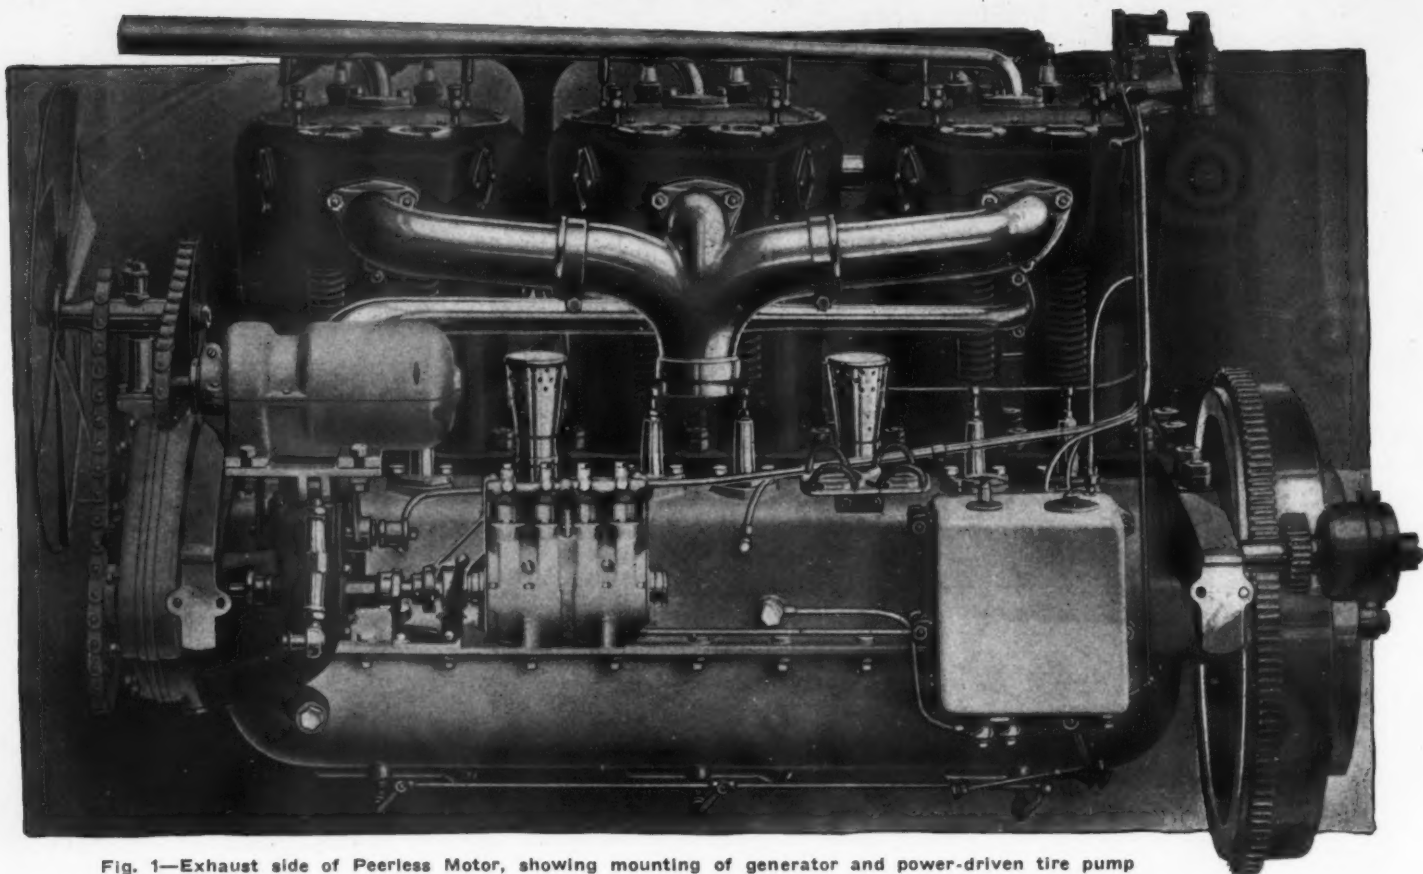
Exhaust side of Peerless Motor, showing mounting of generator and power-driven tire pump
